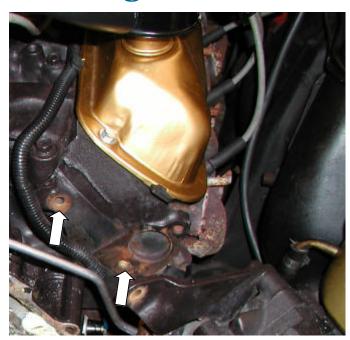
Power Steering Pump Bracket Mounting Holes in Block
